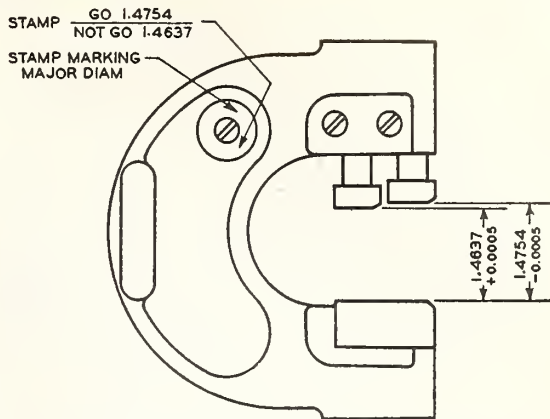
Adjustable plain snap gage (American Gage Design Standard, model C) for checking screw threads of Truncated Whitworth form; nominal diameter $1\frac{1}{2}$ inches; 6 threads per inch; class 2 tolerance.
